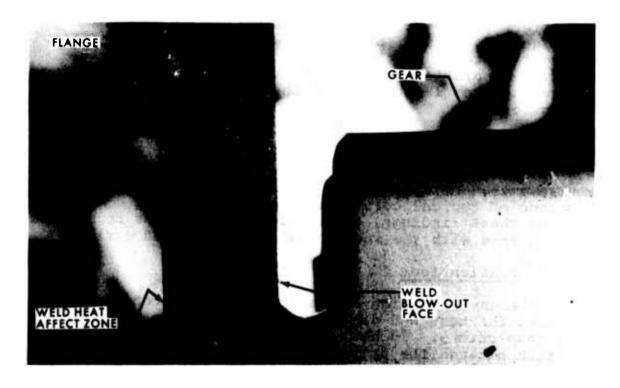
Crack Propagation - Gear/Flange Assembly, Second-Row Pinion.
